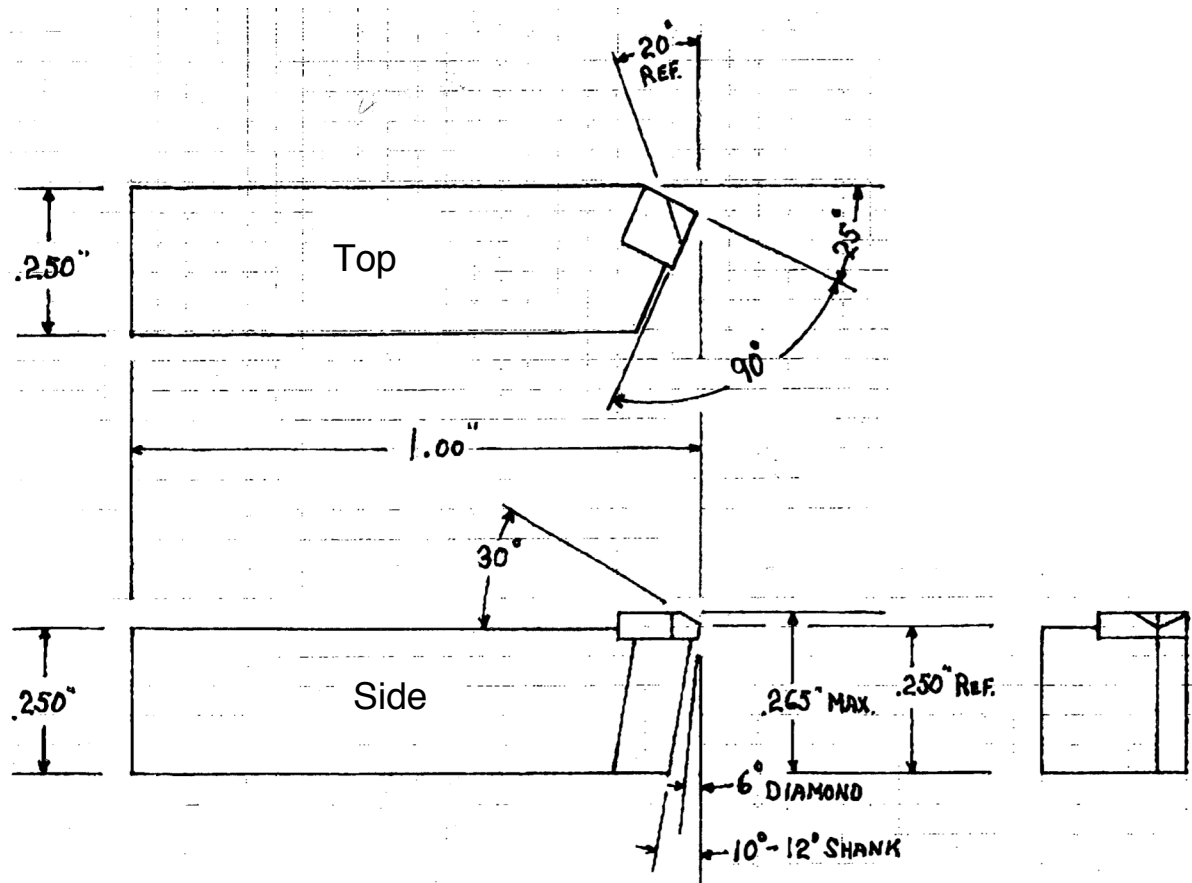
This diamond tool is designed to cut gratings grooves with a blaze angle of 25° (or 65° if one uses the opposite facet). The blaze angle is seen in the top view of the tool. The side view shows the compound angle featuring a double negative rake of 30° .
